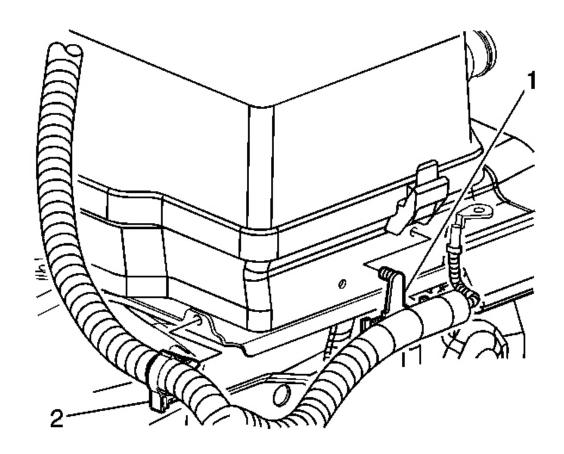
Harness Clips Courtesy of GENERAL MOTORS CORP.
